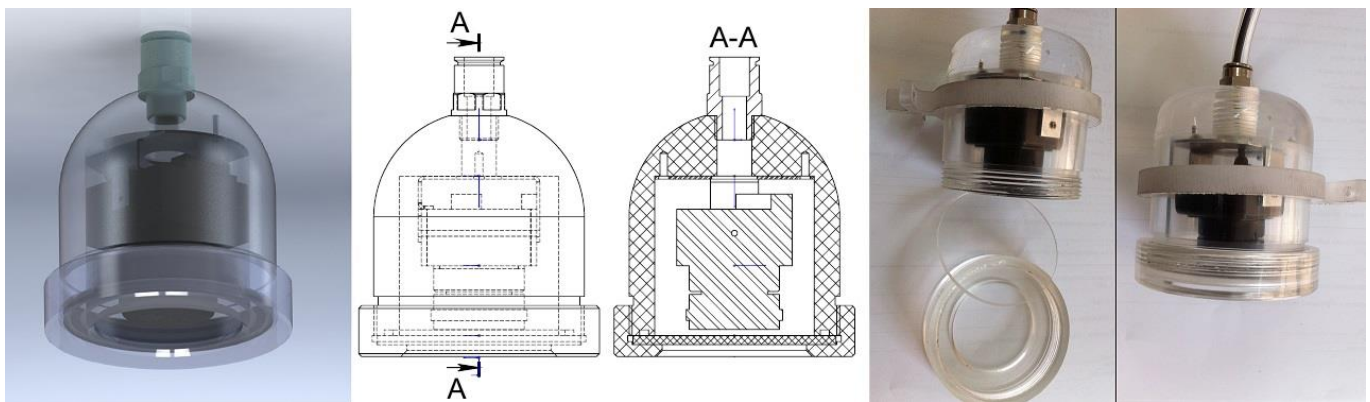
Rear (wide-angle) camera in the housing (CAD model, drawing and real assembly)
